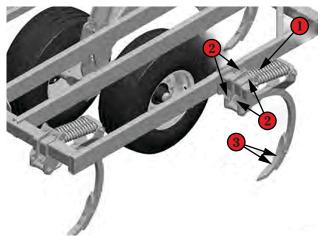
454 kg (1000 lbs) Compression Spring Edgeon Shank
